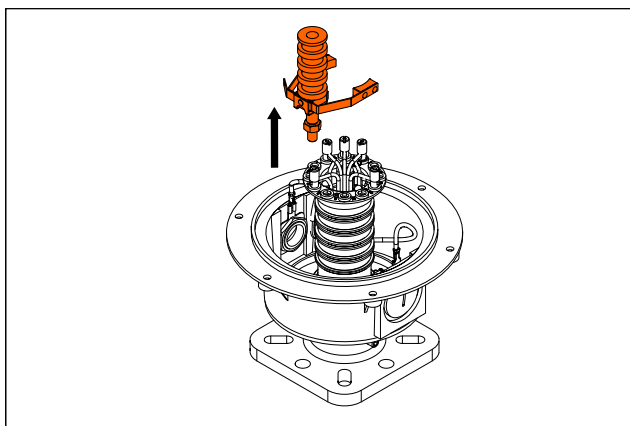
Remove PH+ current collector with the insulator, brush bolt and nut from the housing lower part.
